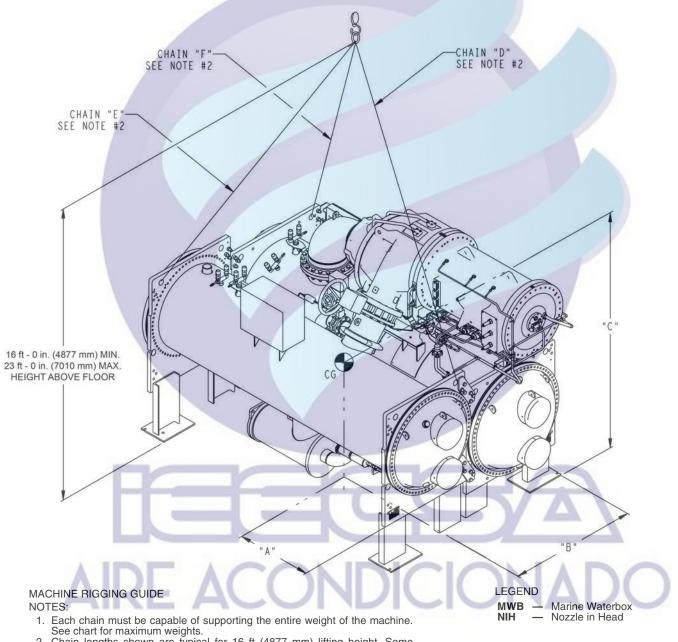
Machine Rigging Guide (Compressor Frame 4, 5, C, and E)
